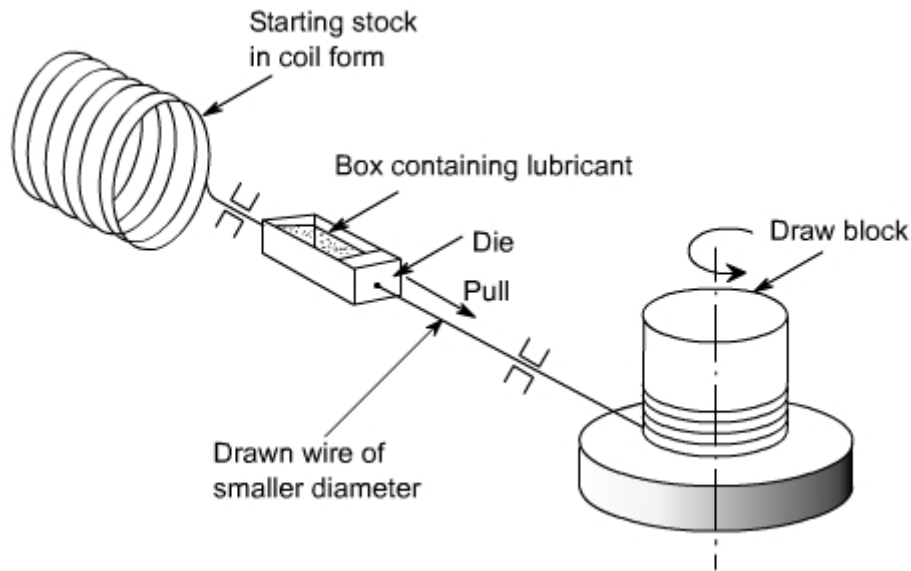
Wire drawing on a continuous draw block. The rotating draw block provides a continuous pull on the incoming wire.
